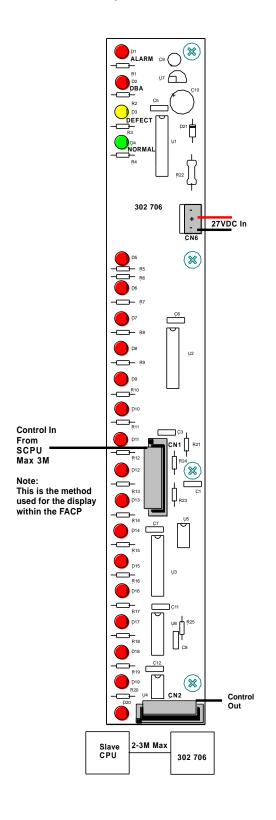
302 701 & 706 Remote (Note maximum distances) LED Expansion Board Layouts
